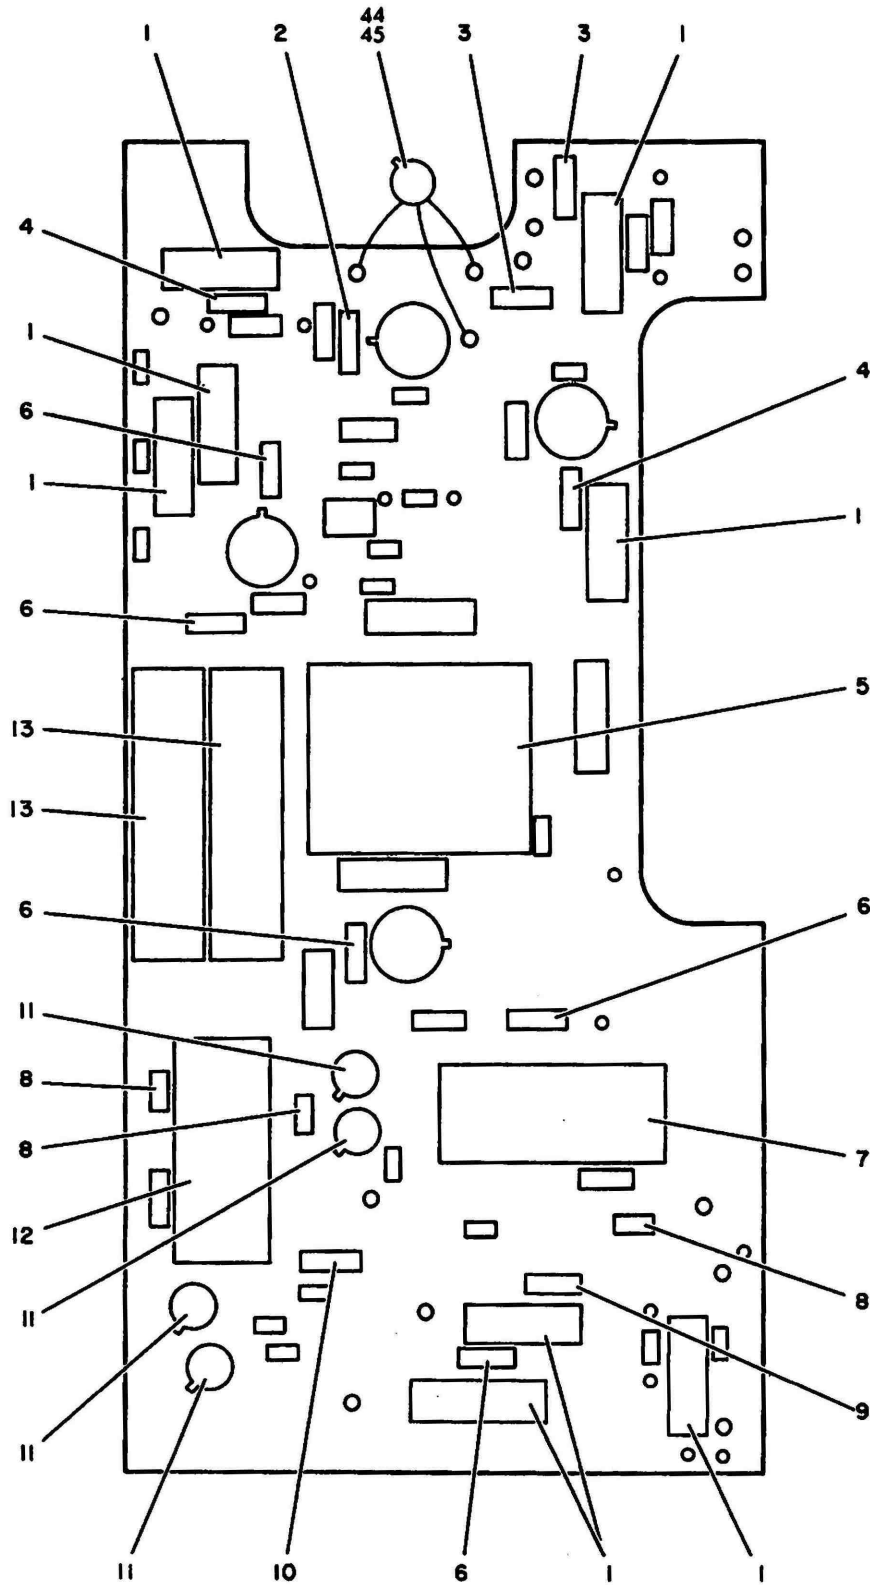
Single Side Band and Mixer Board Assembly (Sheet 1 of 2)
